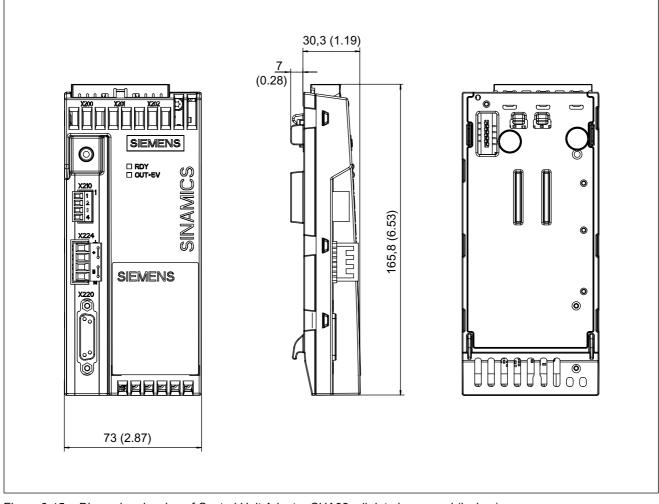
Dimension drawing of Control Unit Adapter CUA32, all data in mm and (inches)
